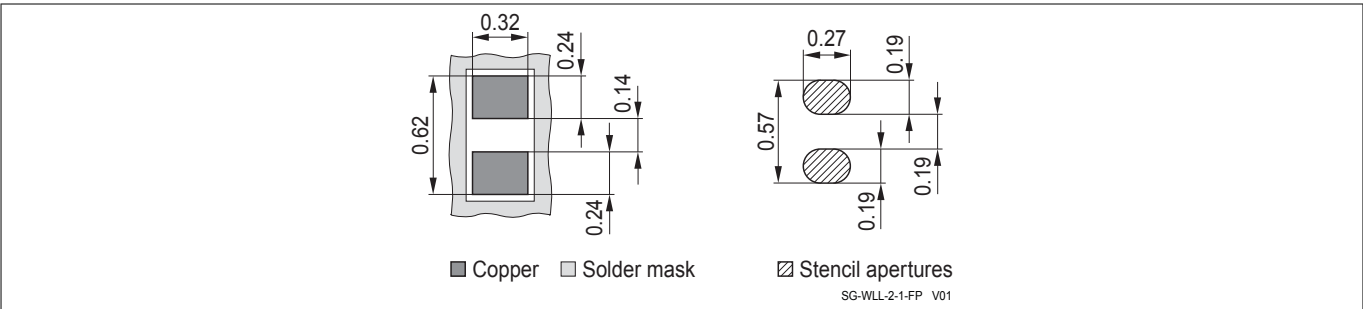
WLL-2-1 Footprint (dimension in mm), recommendations for Printed Circuit Board Assembly see [2]
